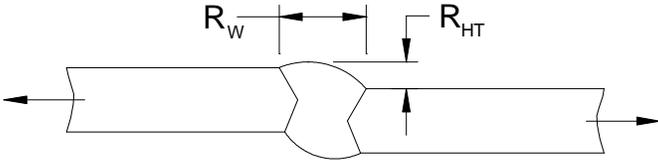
Butt-Welded Plate Weld Reinforcement - Variables
